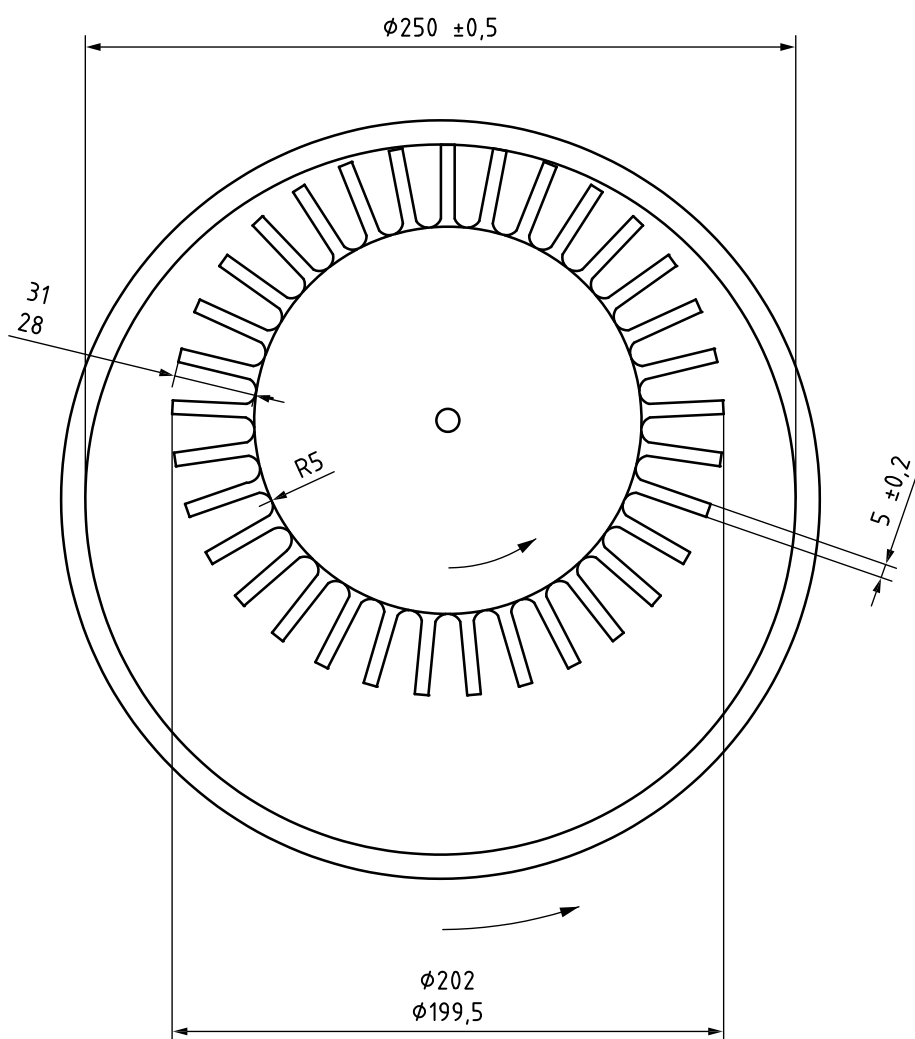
Roll and beater housing dimensions of the PFI mill
